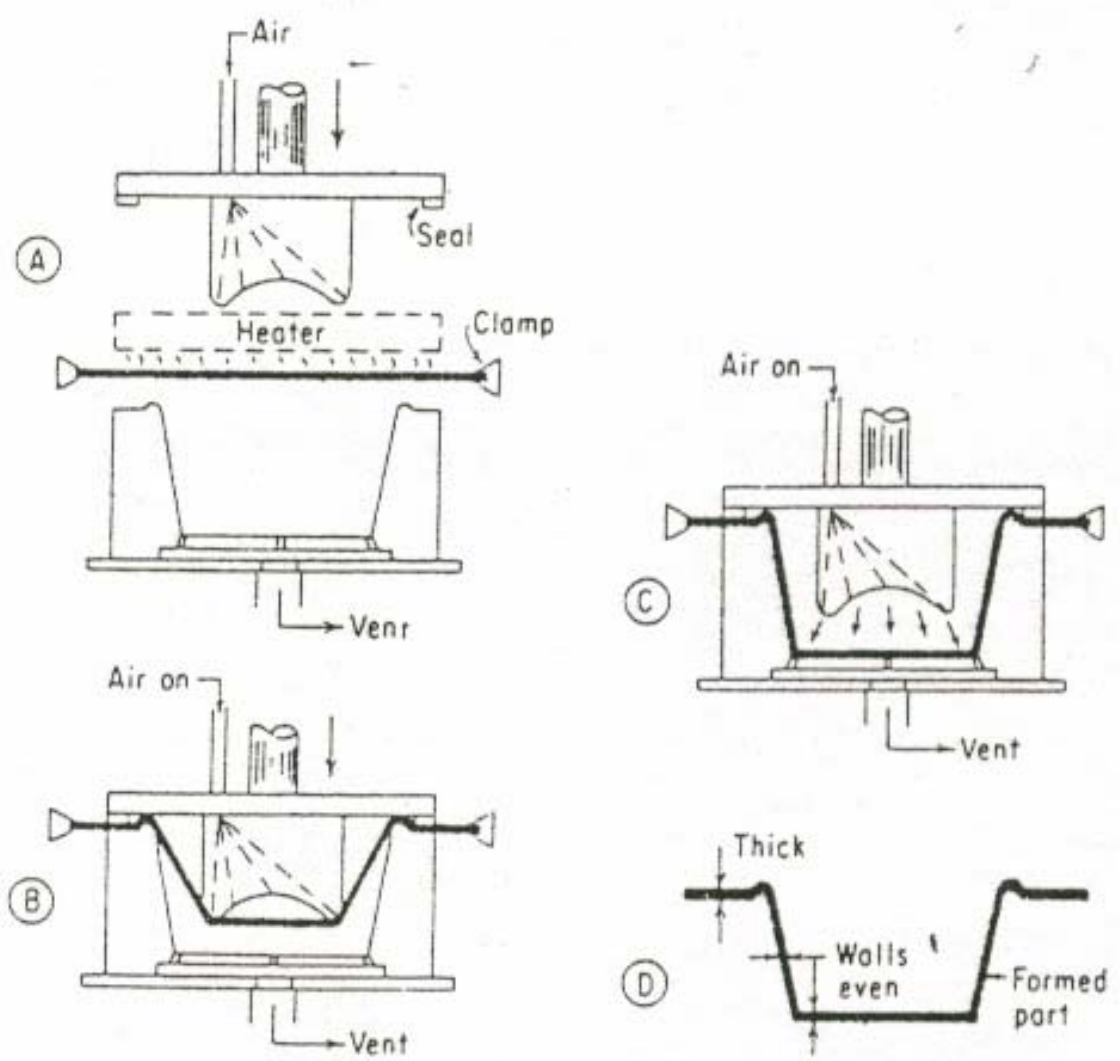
Plug-assist pressure forming. (Courtesy McGraw-Hill)
